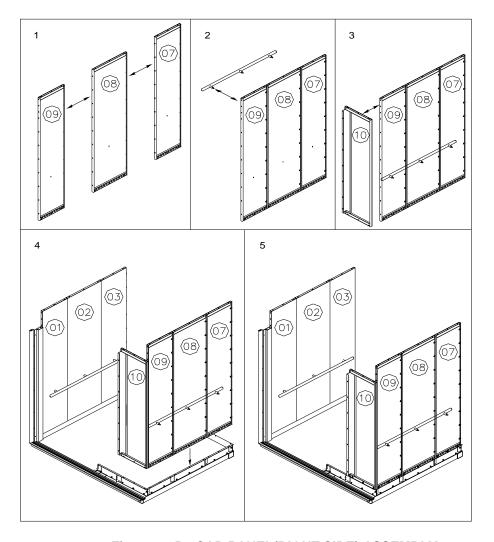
B. CAR PANEL(RIGHT SIDE) ASSEMBLY
